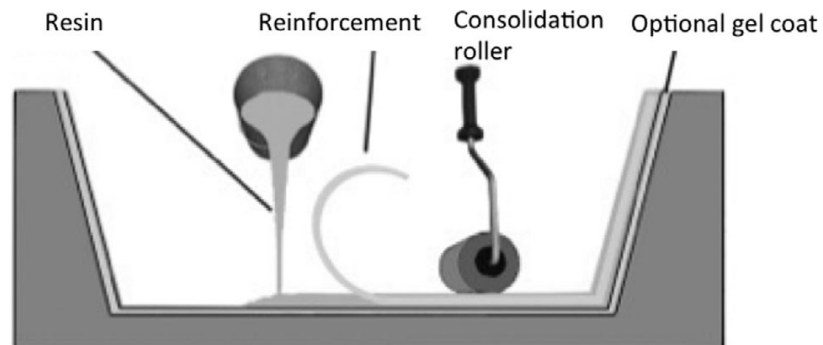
Schema of the handy lay-up fabrication process [16].
